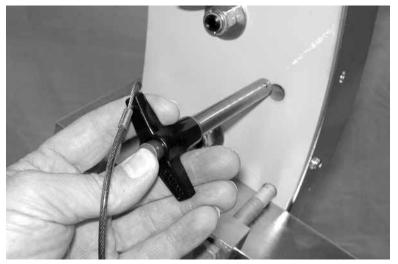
Insert the frame locking pins to lock the stationary and rotating rings together.
